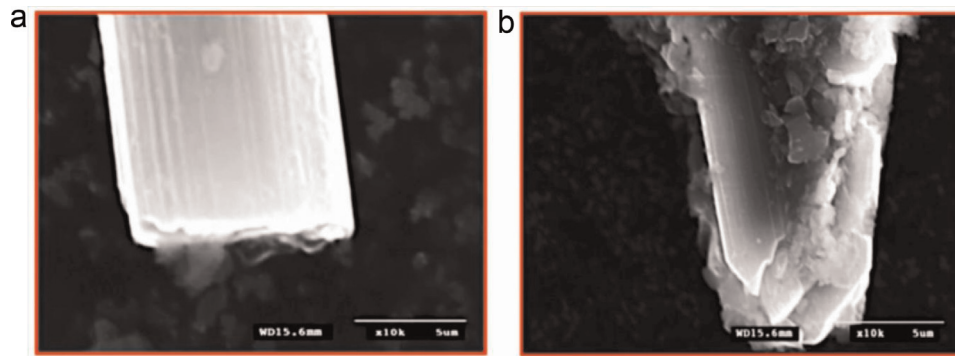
Fractured ends of single carbon fibre strands resulting from (a) drilling with laser generated PCD drill – shearing, (b) drilling with electroplated diamond drill – abrasion/rubbing.
